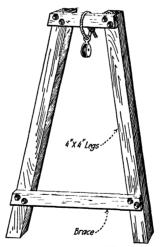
Illustrating an "A" frame used in erecting heavy machinery.
